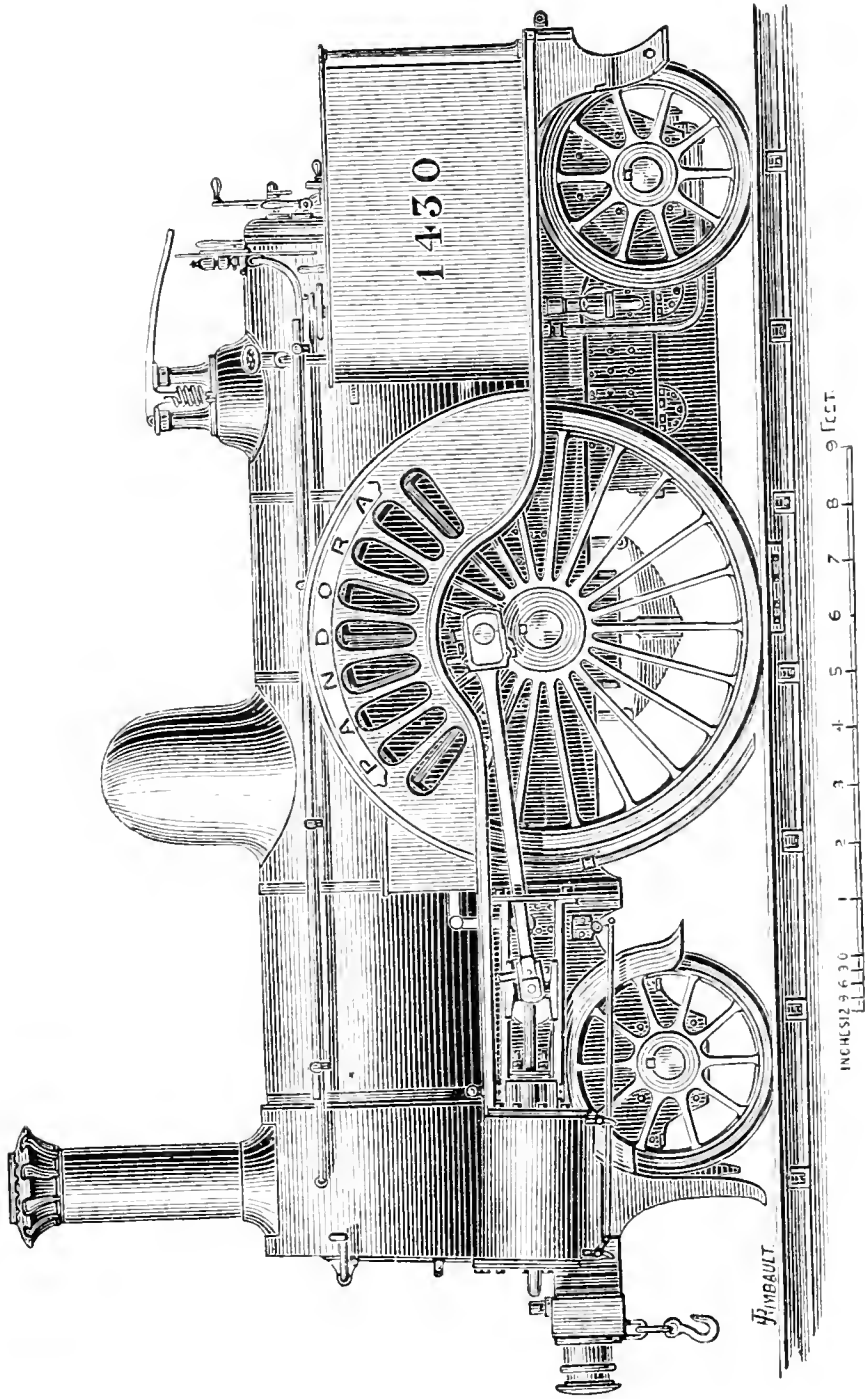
“PANDORA,” an Express Engine, designed and constructed at Crewe, by JOHN RAMSBOTTOM, Esq., late Locomotive Superintendent L. & N. W. Railway.
